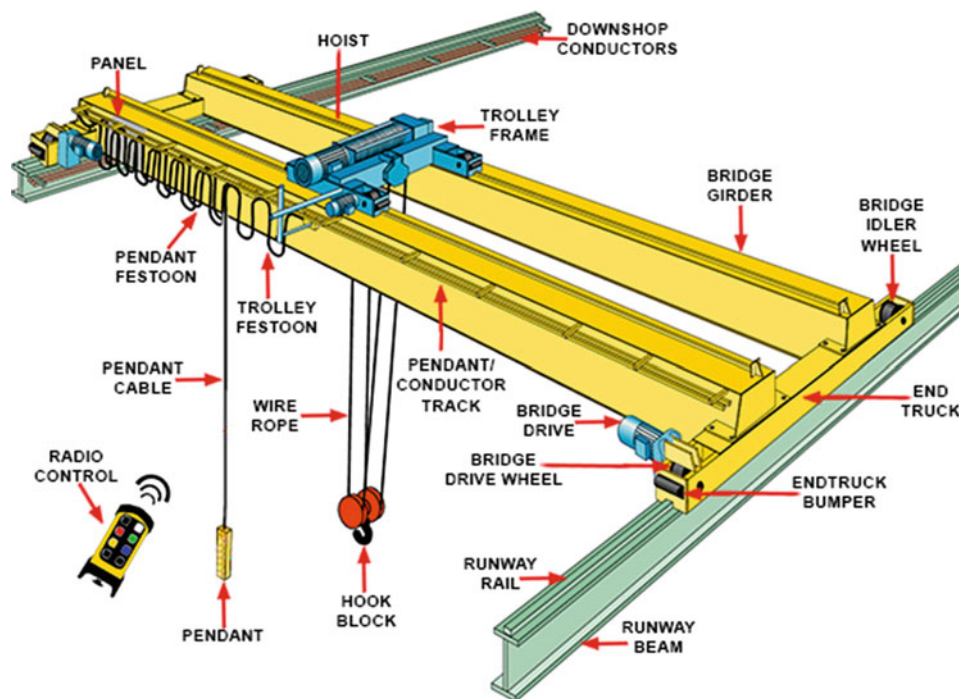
Parts of a bridge crane. This study is centered on runway beams, named at the bottom of the figure (Source: [3])
